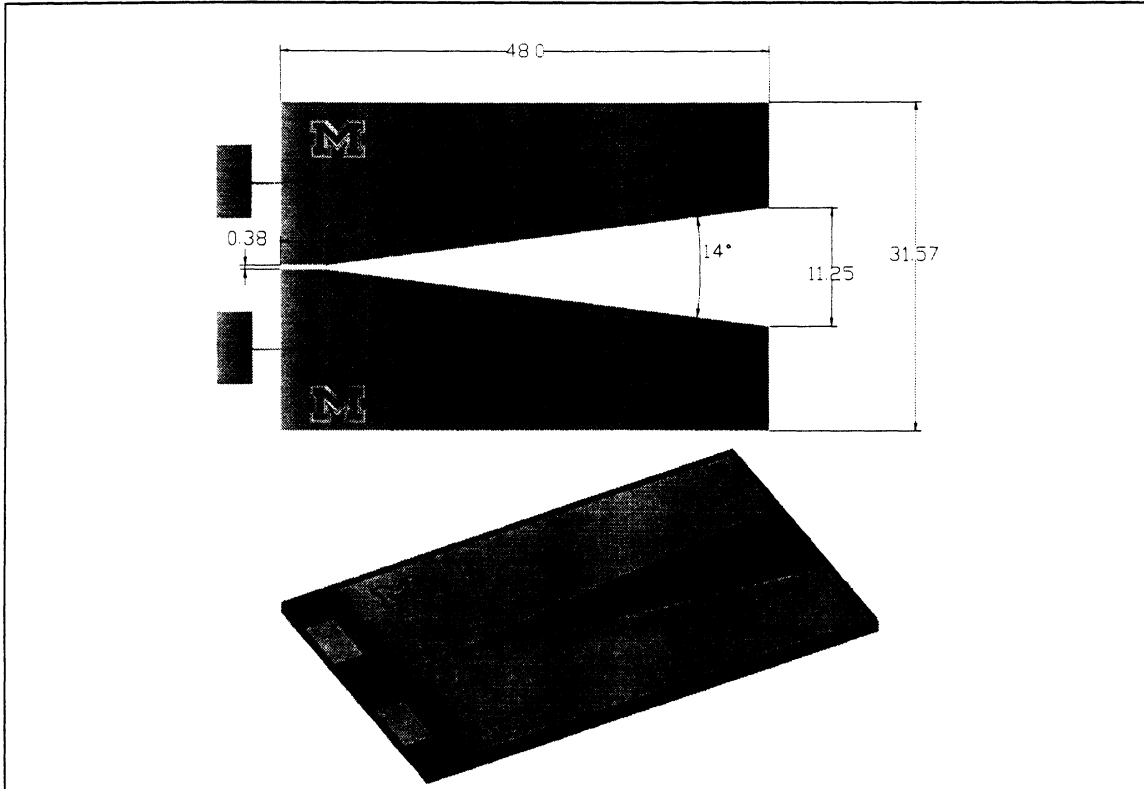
Conductor pattern for micro-machined tapered slot antennas. The patterns were designed on AutoCad and machined using QuickCircuit and a CAM milling machine. The antennas were designed to operate around 30 GHz. (Dimensions in mm).
